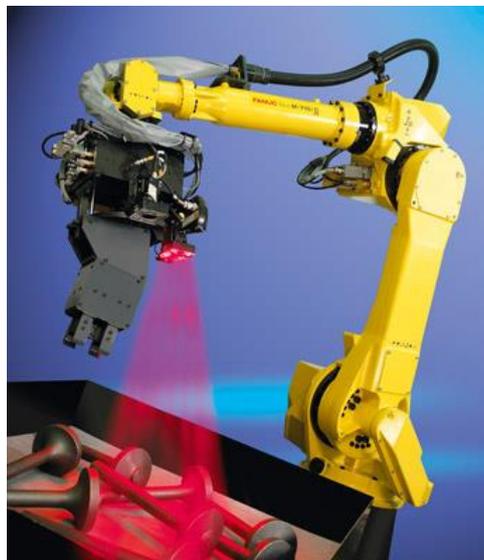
Vision Guided Robots: case of a 3D camera mounted on a robotic arm
